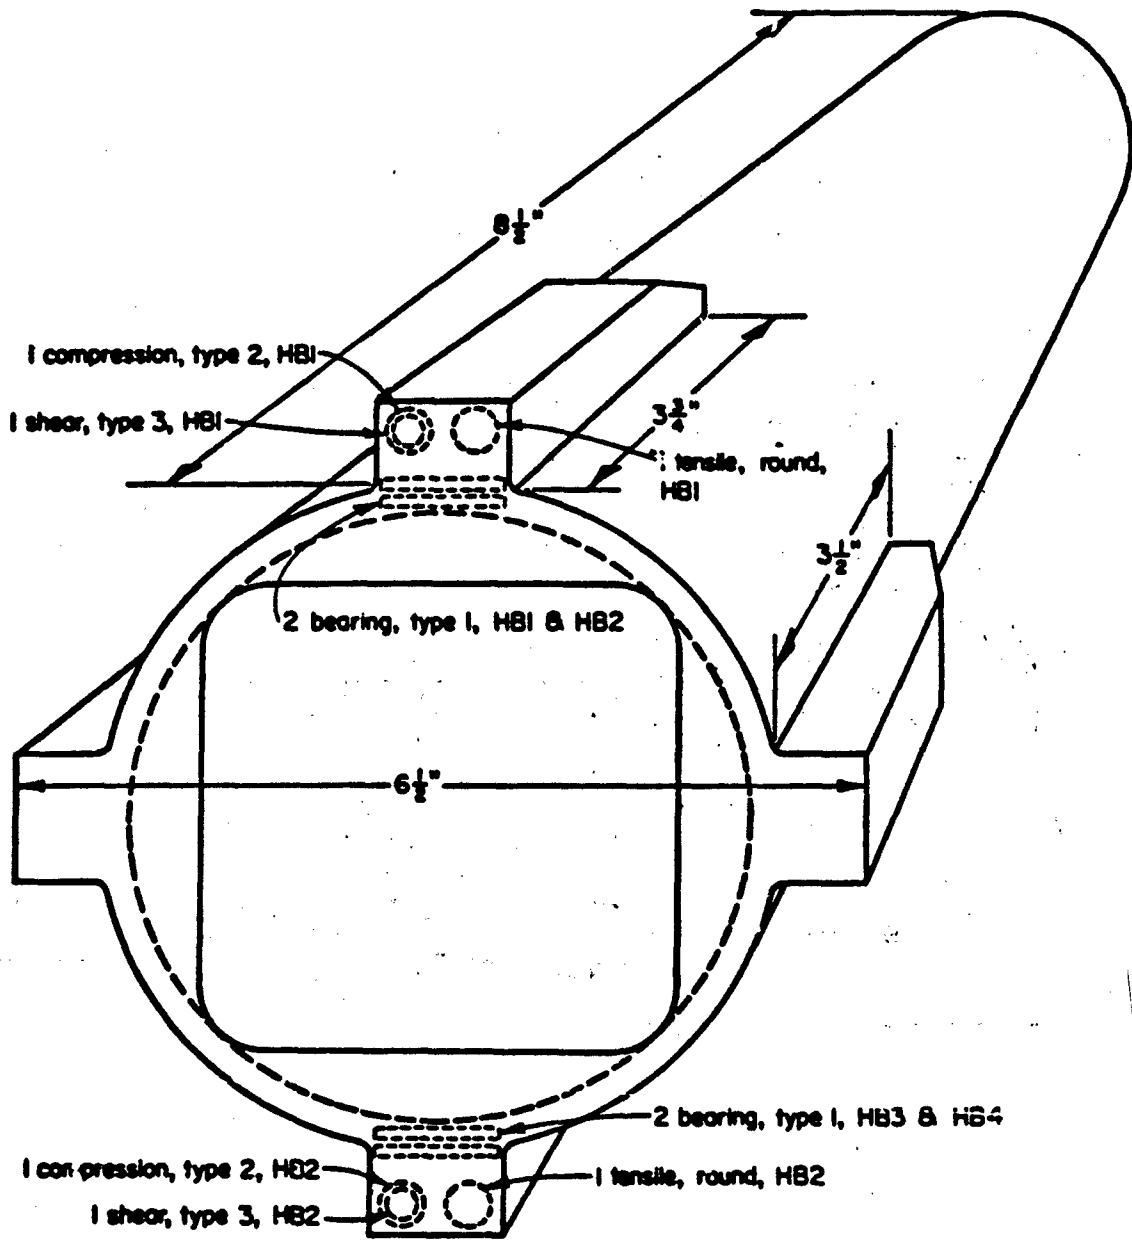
LOCATION OF TEST SPECIMENS FOR CASTING HB
